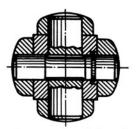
Universal joint, the smaller pin being retained by wire snap ring.
